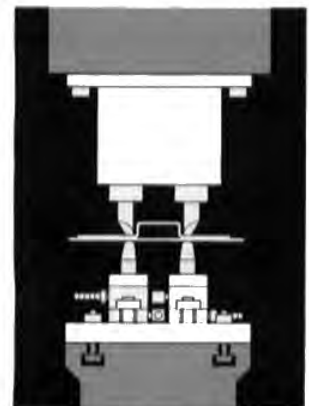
A platen set-up using platen-mounted standard tips under an Equa-Press dual holder.
